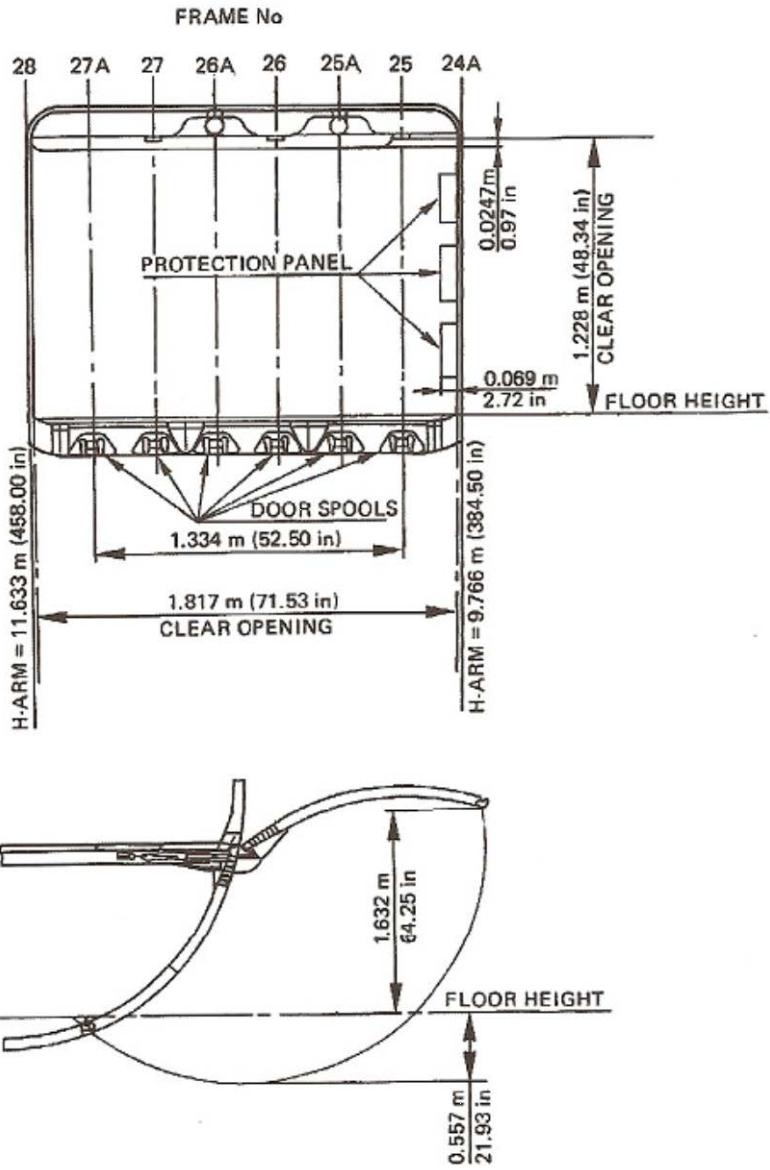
Airbus A320 – Forward Cargo Hold Layout and Dimensions
